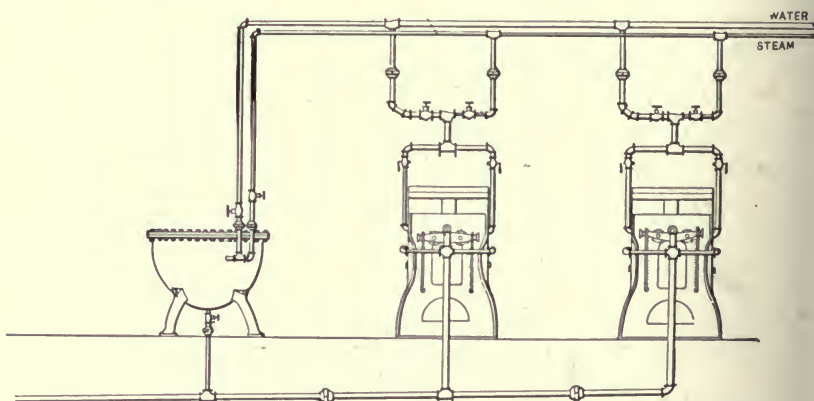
Steam and Water Connections of Candle-machines. Double-box type.
